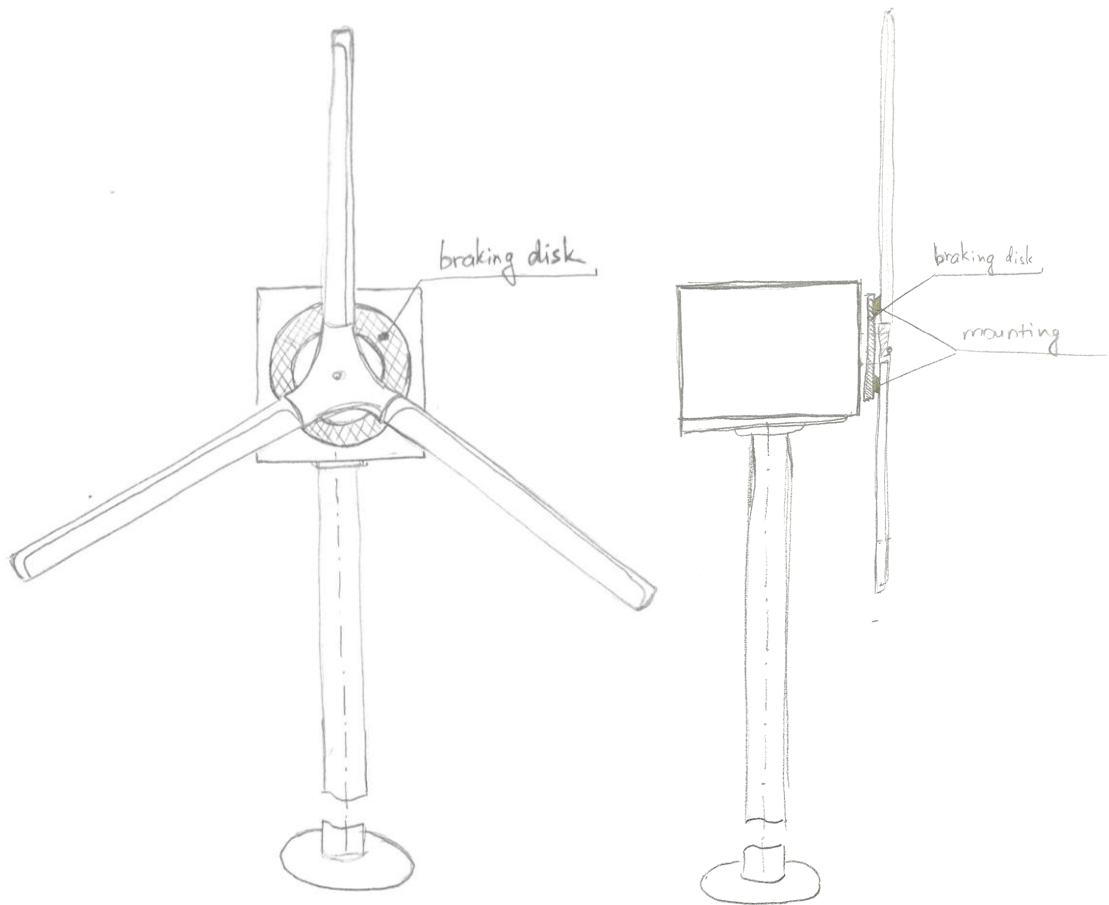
The sketch of a braking disk attached to the wind turbine.
